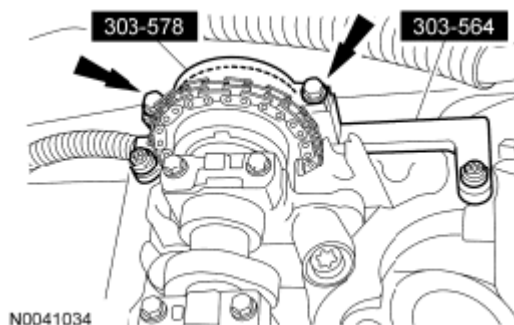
Identifying Camshaft Sprocket Holding Tool And Adapter (303 - 564)
